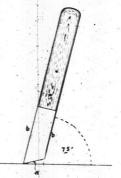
Shewing knife and cutting angle. be found of little use, and a knife of some sort is necessary. In the hands of a skilful adult the ordinary pocket knife may answer, but for children a broader pointed, and therefore safer, shape must be used. Many forms have been suggested and tried, but the writer prefers the shape shown in Fig. I. The cutting edge is at a and the edges b b,
